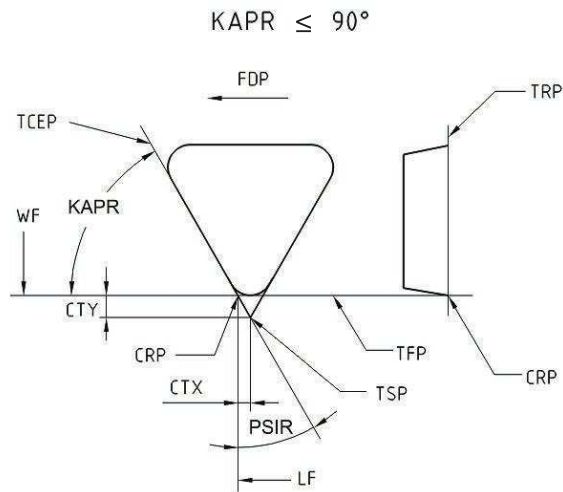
Feed direction parallel to tool axis —  $KAPR \leq 90^\circ$
